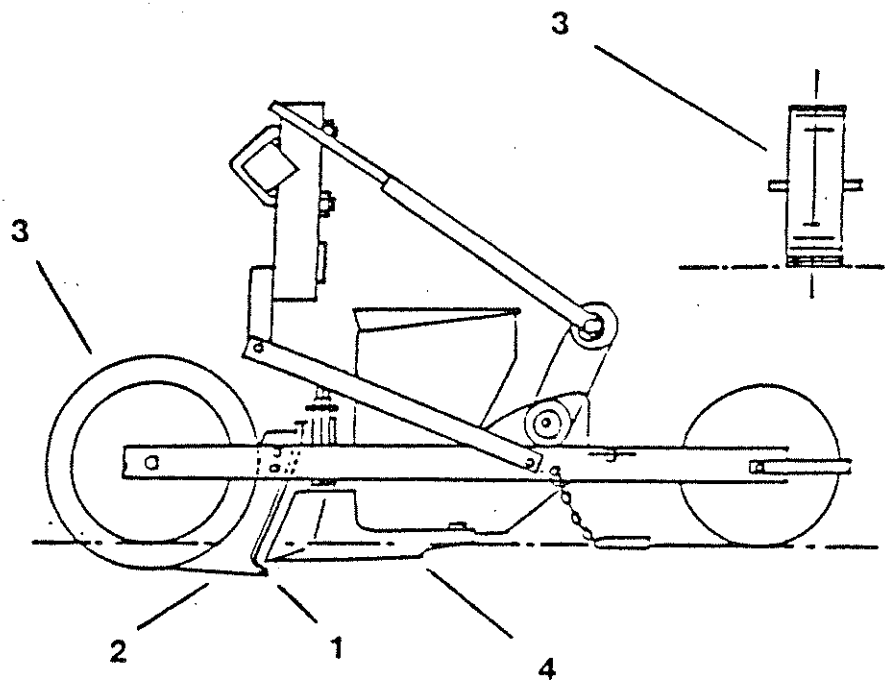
Early prototype injection coultter fitted to Stanhay S870 drill. 1 Fertiliser outlet, 2 injection coultter, 3 Stanhay trash-cutting front wheel, 4 seed coultter.
